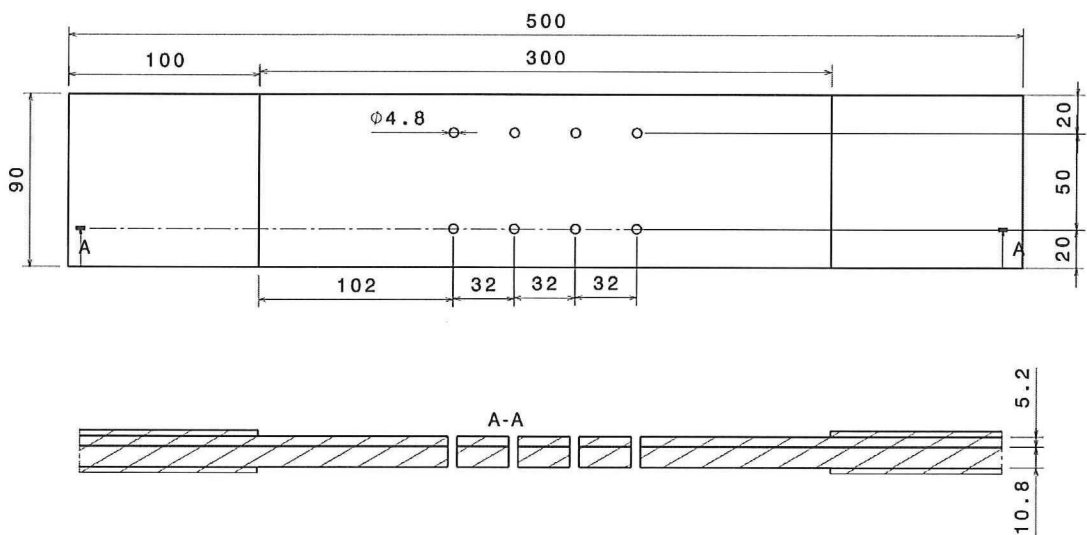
Schematic drawing; front view shown at the top, side view at the bottom
